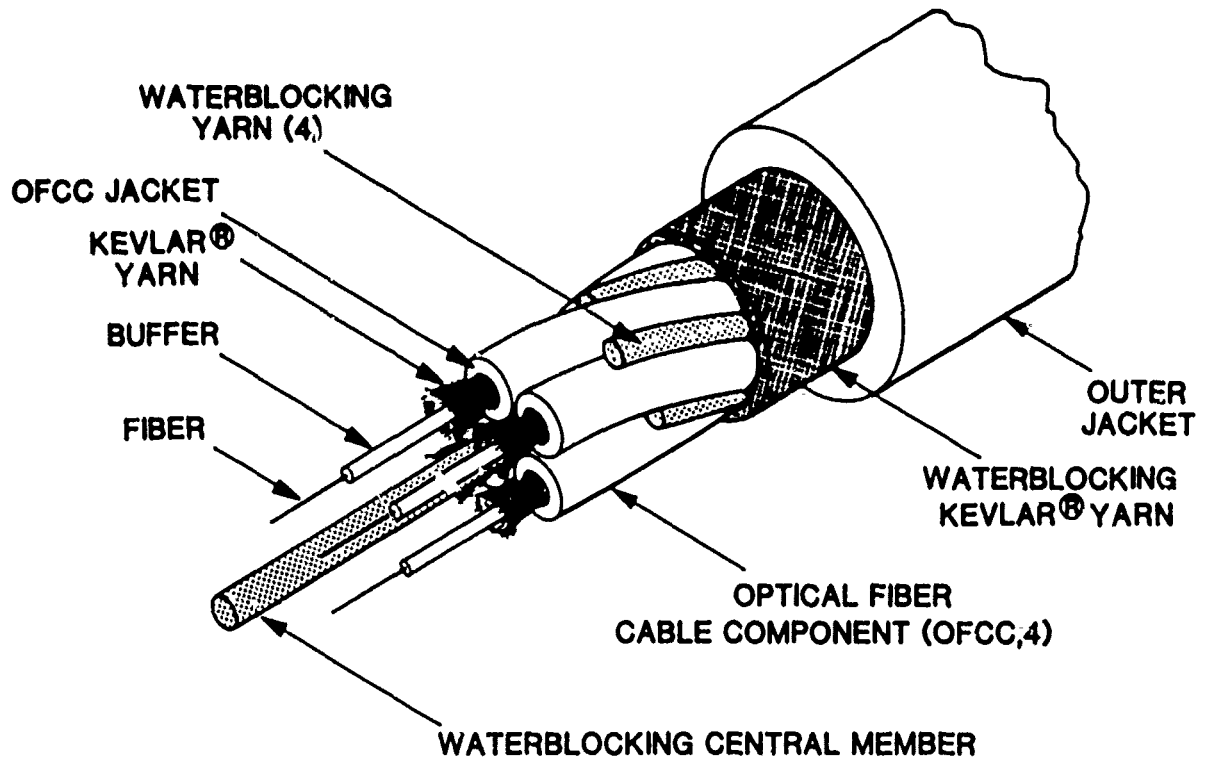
Isometric View of 4-OFCC Shipboard Cable
